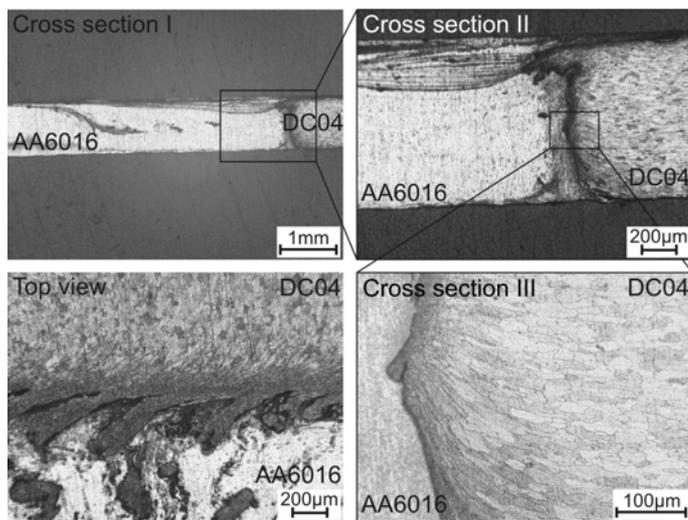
Appearance of the weld seam in a cross section (I-III) and a top view
